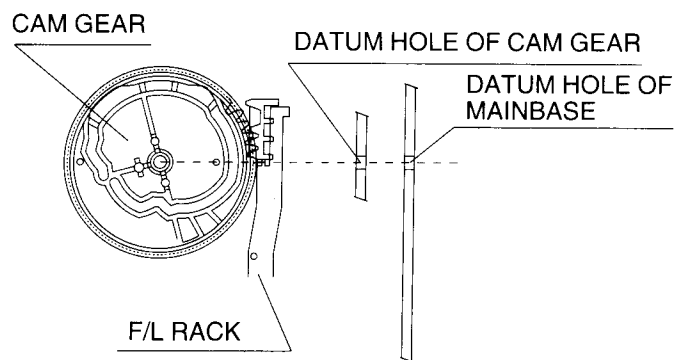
ASSEMBLY OF THE CAM GEAR & F/L RACK
